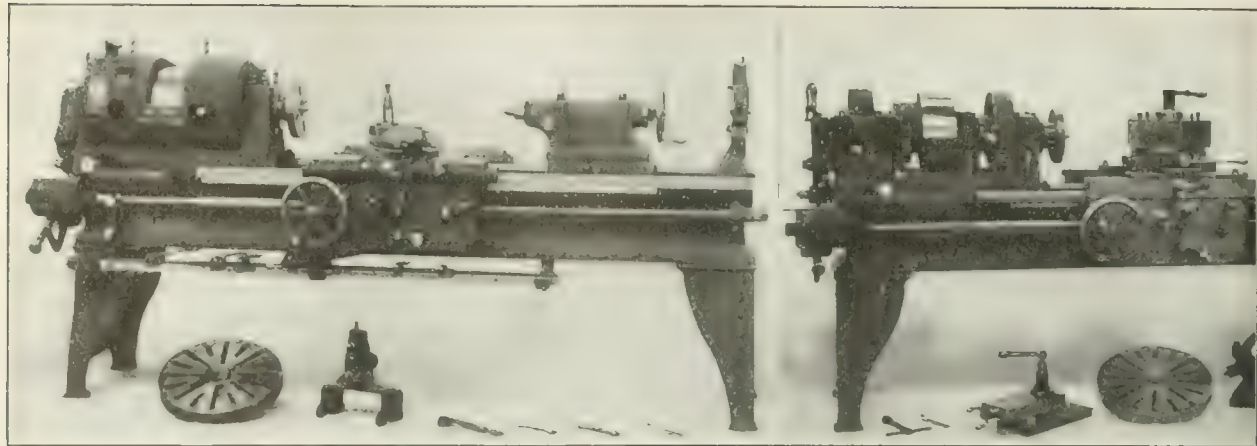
Cast Iron Cover Completely Inclosing Headstock Gearing.
